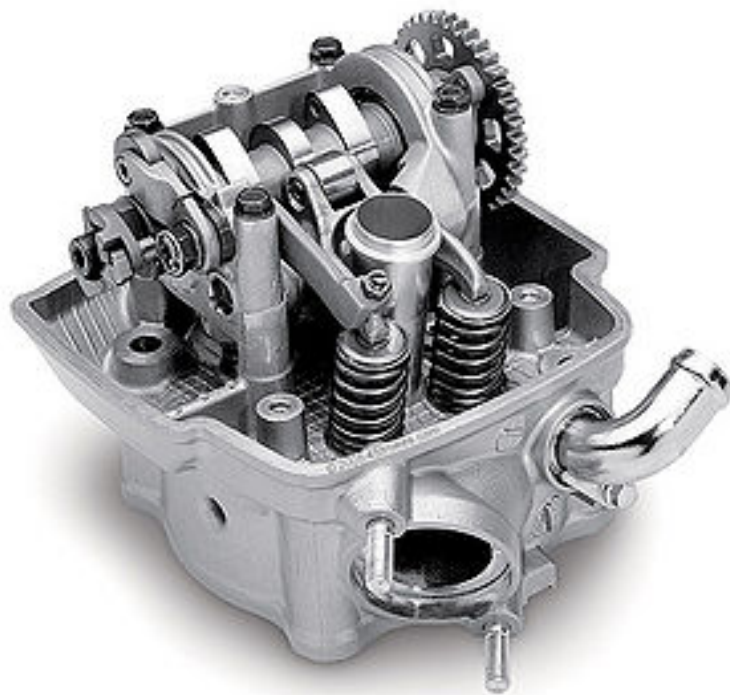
Honda Unicam engine. It's possible to see that only one camshaft, with two cam lobes, is used. [12]
